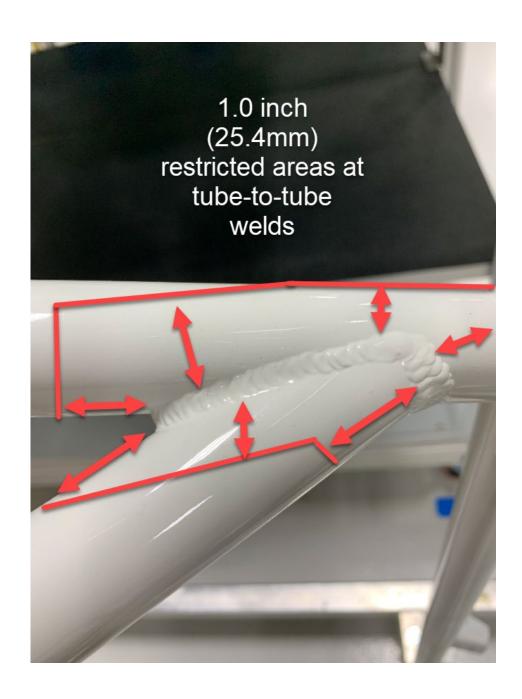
Restricted Areas at Tube-to-Tube Welds (Typical)
